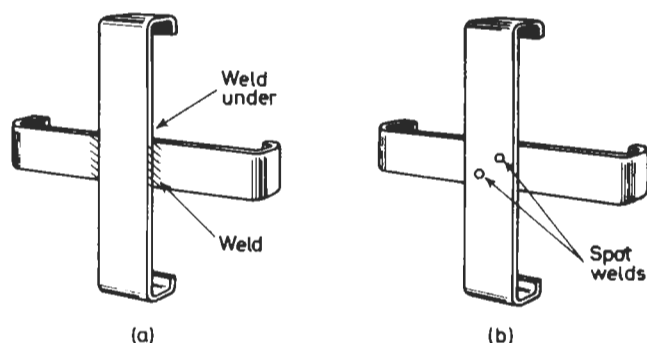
Methods of joining straps. (a) Continuous welds prevent entrapment of process solution during plating and corrosive liquid during service, and (b) spot-welded joint leaves space in which process solution and corrosive liquids can be trapped
